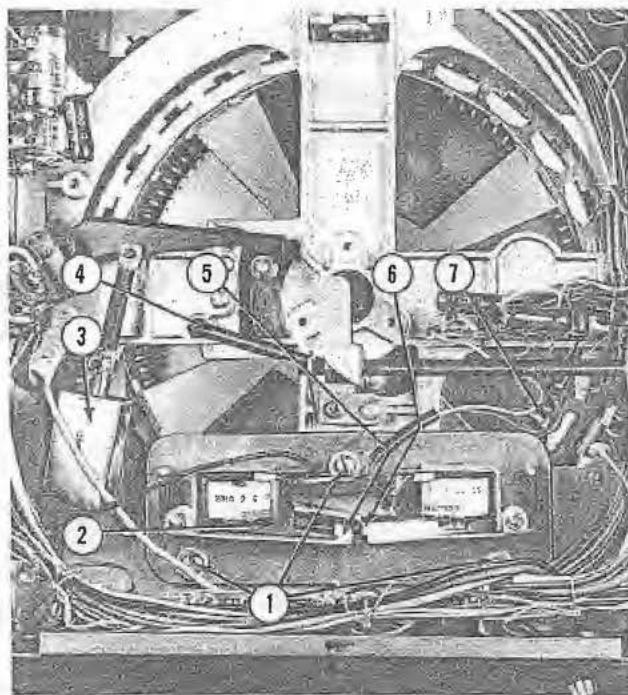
ELECTRIC SELECTOR ASSEMBLY
